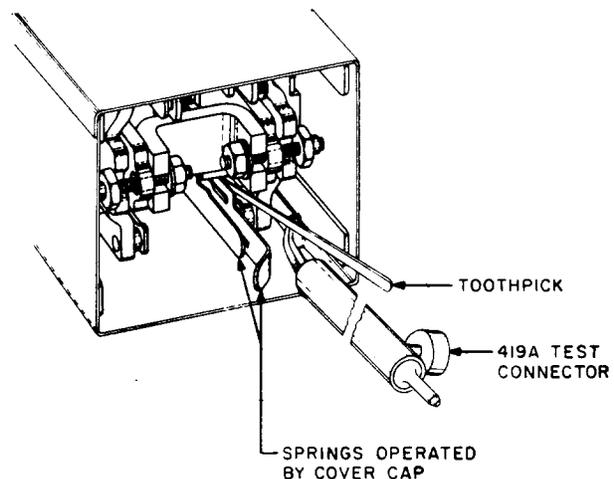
Method of Blocking Cover Cap Operated Contact Springs
